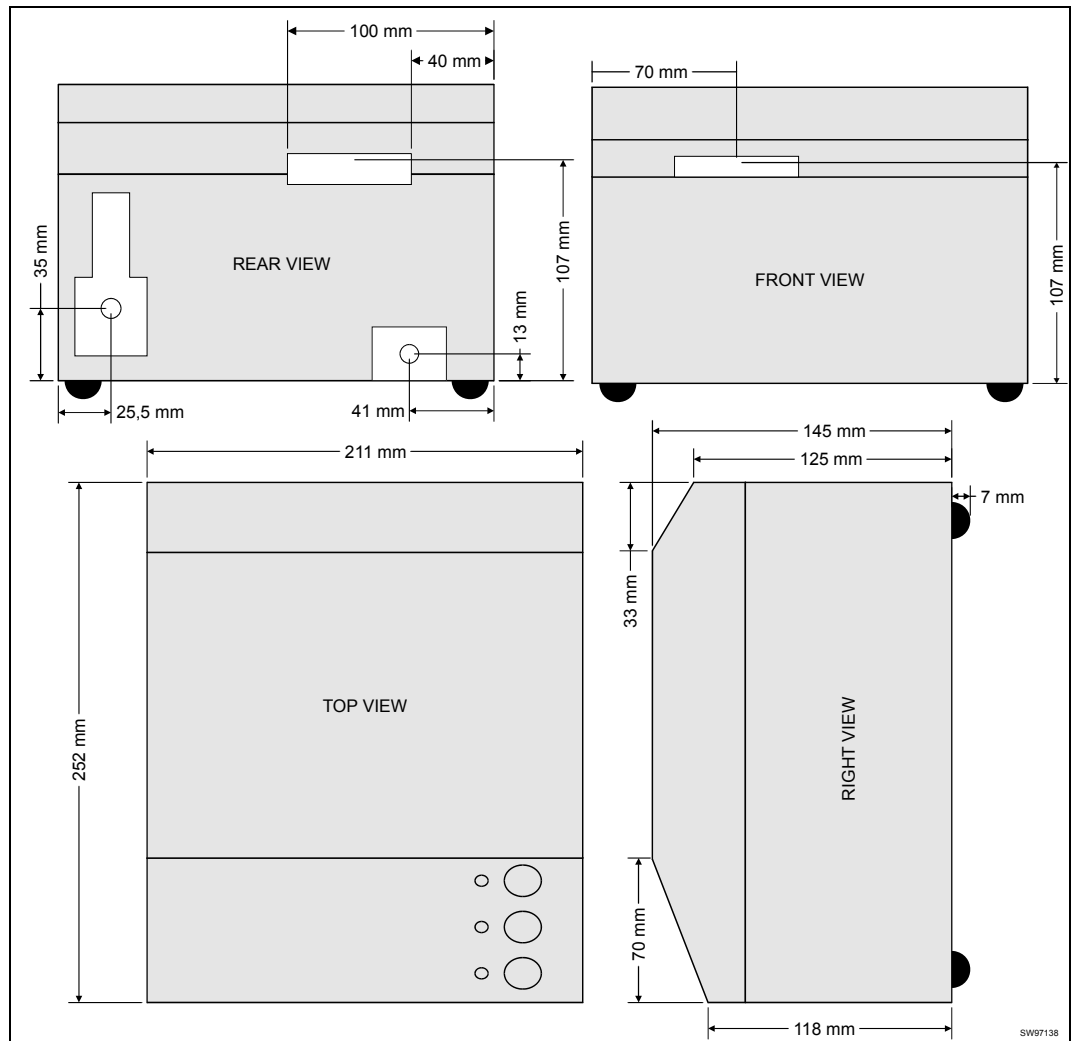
Dimension drawing for CPM 2030 Desktop printer. All measurements are in mm
